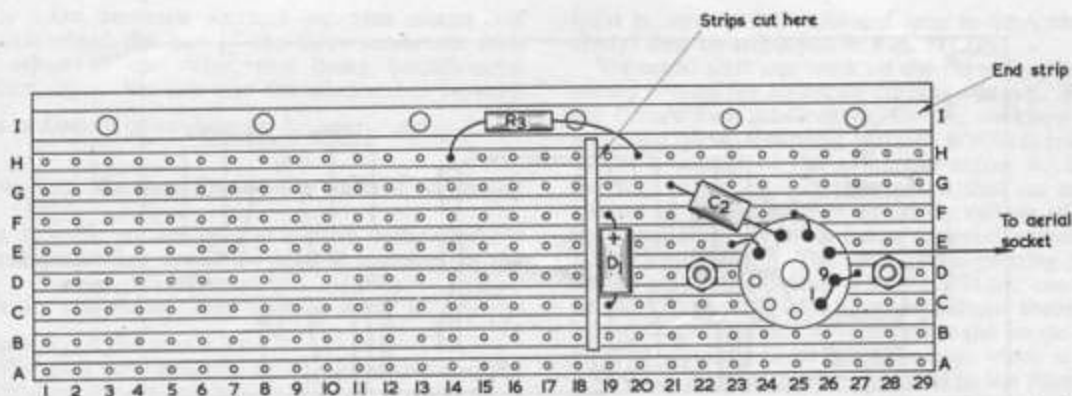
Wiring on the conductor side of the Veroboard. Note that a connection from D28 to D19-22 is carried over by the metal frame and mounting nuts of the coil holder. The nuts should not short-circuit against strips C or E
